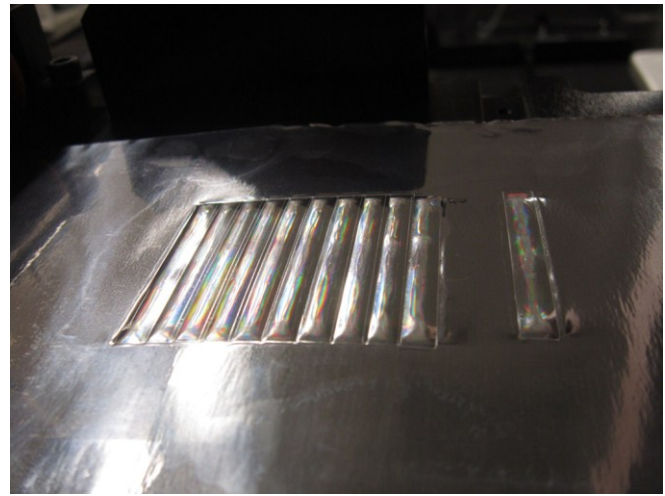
Progressive stamping of micro-textured aluminum sheets by using the table-top CNC-controlled stamping system.
